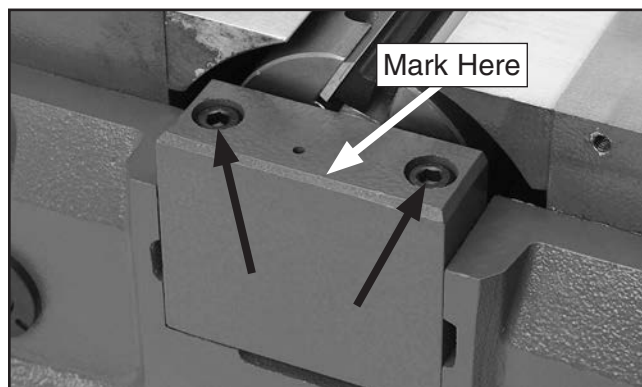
Location for removing cap screws and lock washers on front bearing block.
